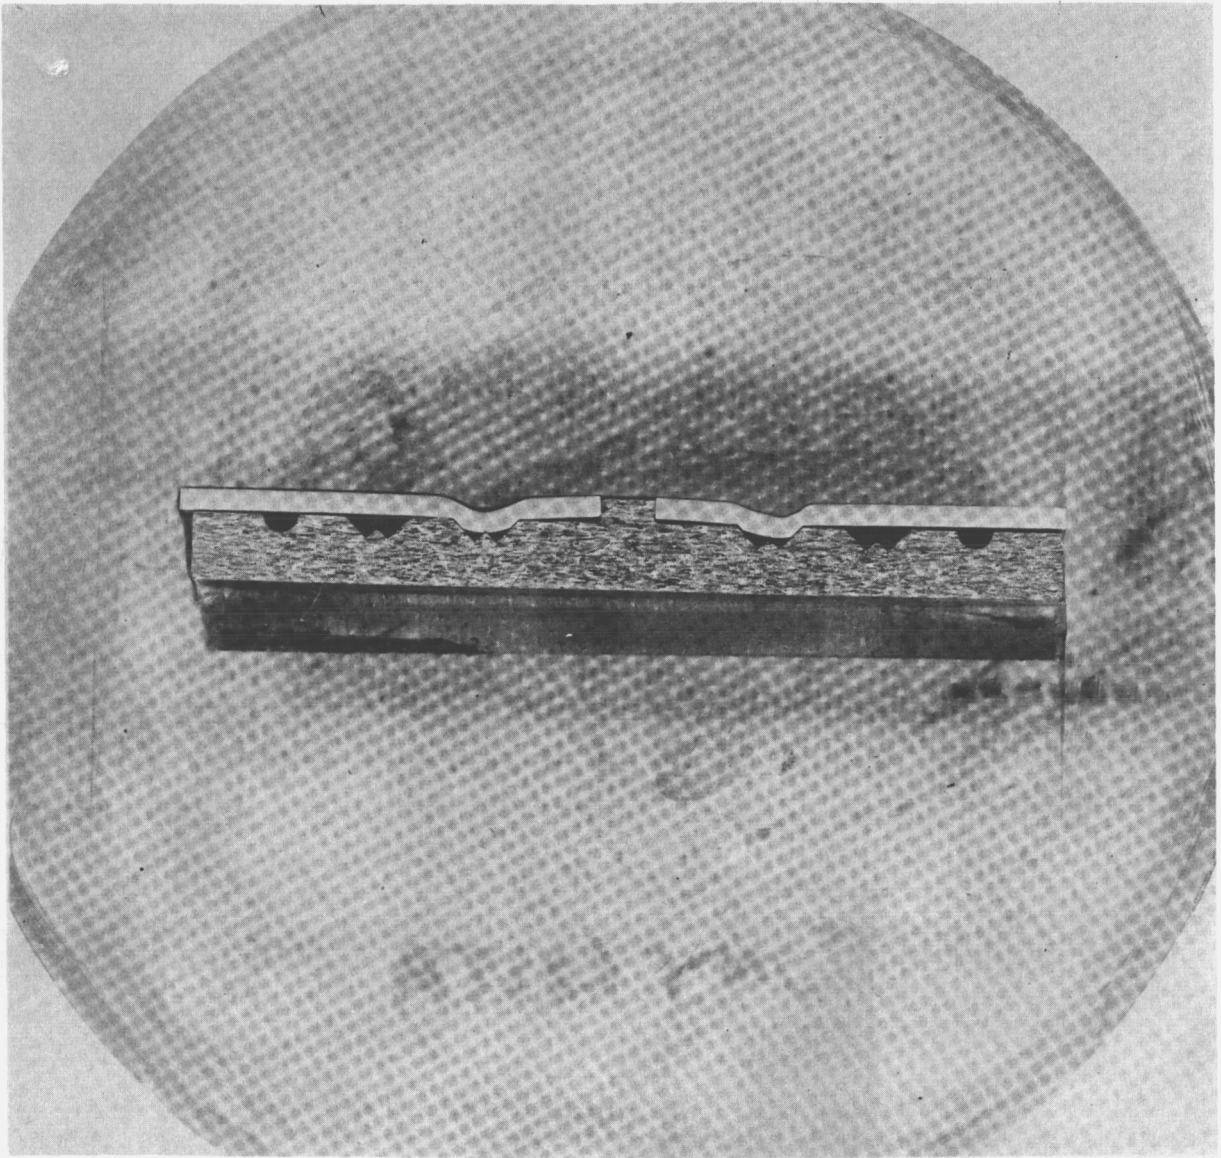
Cross-section of Joint Constructed with Explosive Wire.
